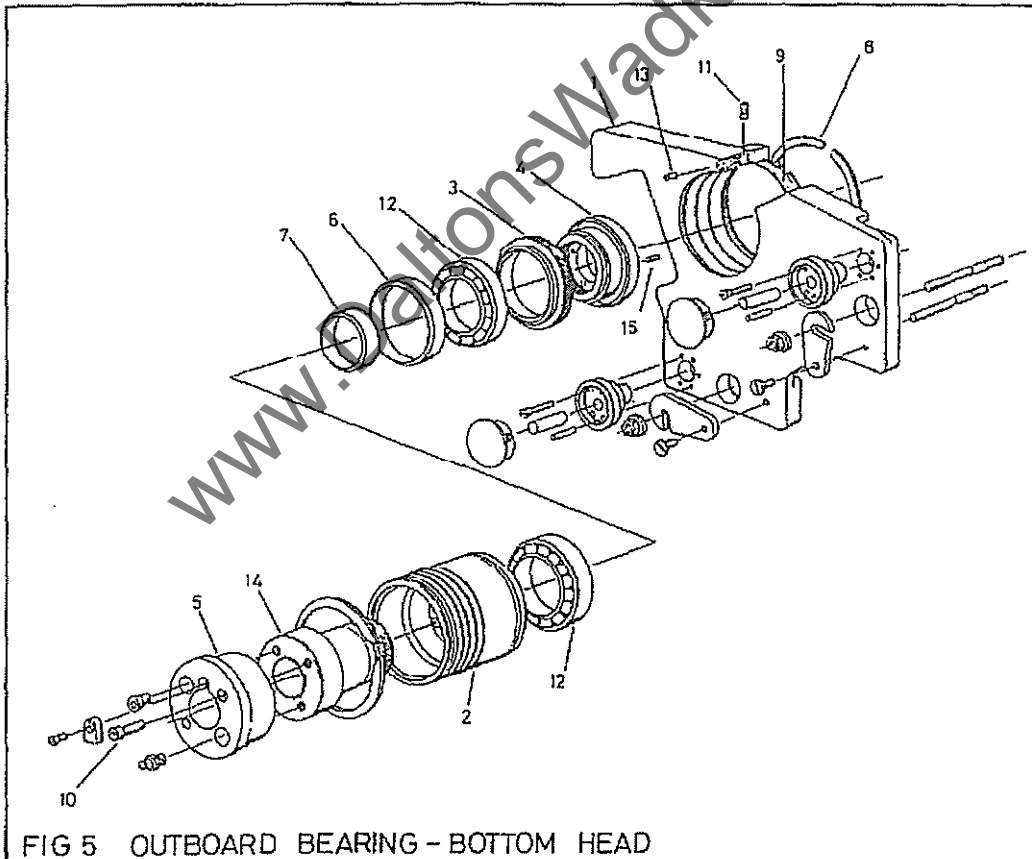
OUTBOARD BEARING - BOTTOM HEAD
